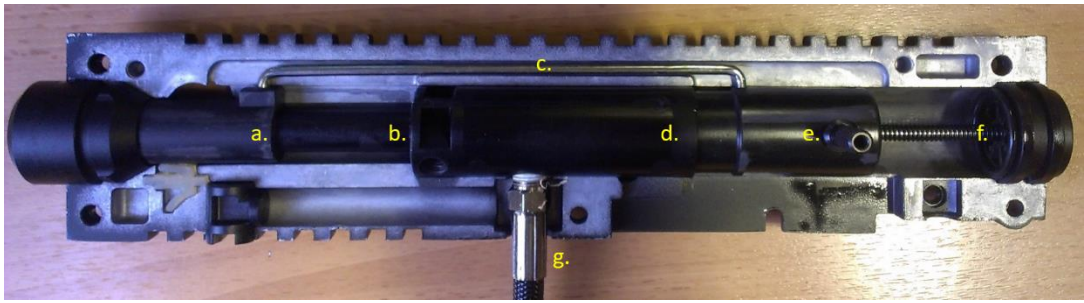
Interior components of the firing mechanism: a. bolt b. valve tube c. linking arm d. valve e. hammer f. drive spring g. gas inlet
